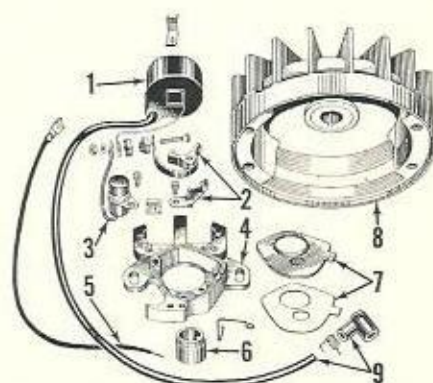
Exploded view of Wico magneto used on all models except model 275. Refer to Fig. CA5 for exploded view of model 275 magneto.
